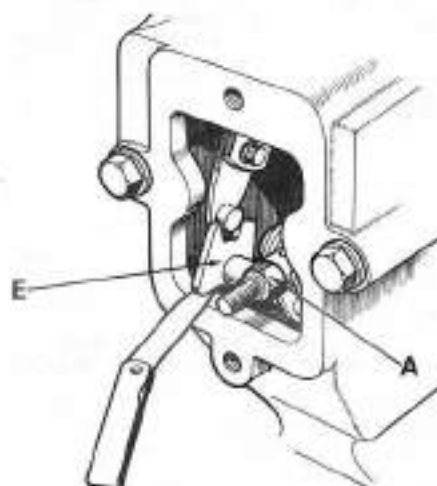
View with cover removed from right rockshaft bracket showing pump valve linkage adjusting nut (A) and operating lever (E). Refer to text.
